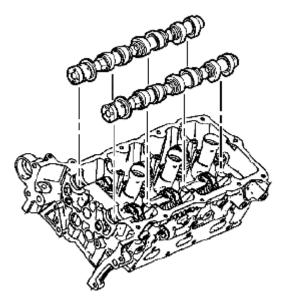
Applying Lubricant GM P/N 12345501 (Canadian P/N 992704) To Camshaft Journals And Left Cylinder Head Camshaft Carriers Courtesy of SUZUKI OF AMERICA CORP.
